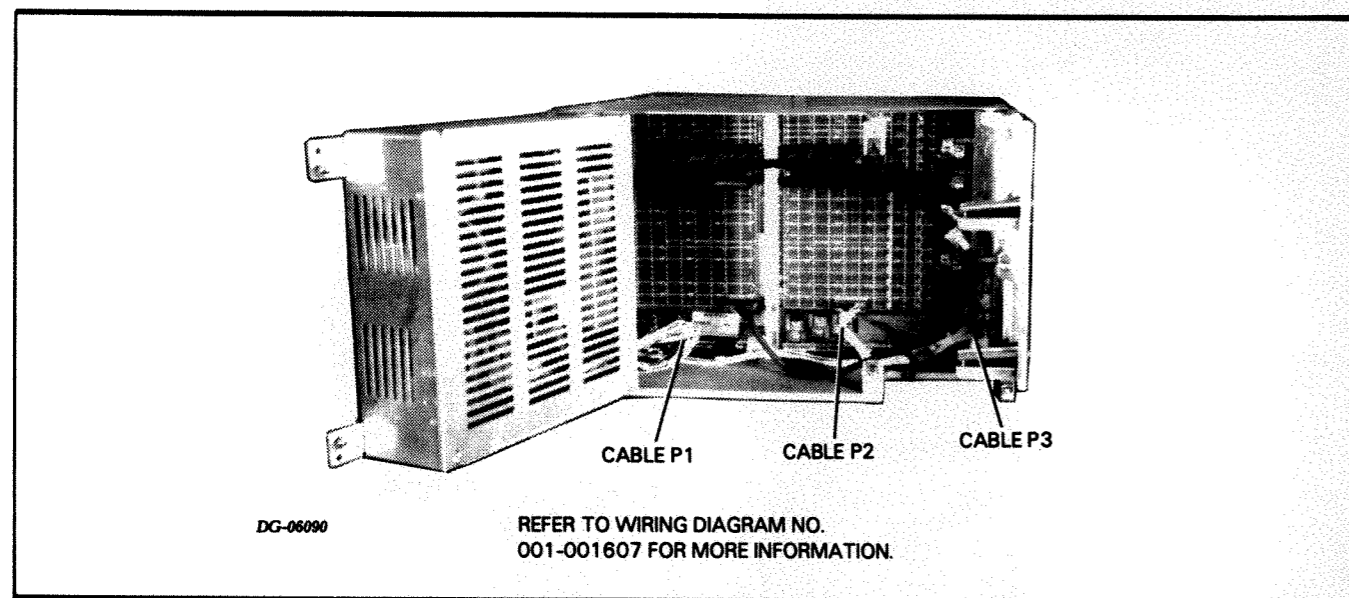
16-SLOT CHASSIS, WITH VNR UNIT AND WIRING HARNESS EXPOSED
